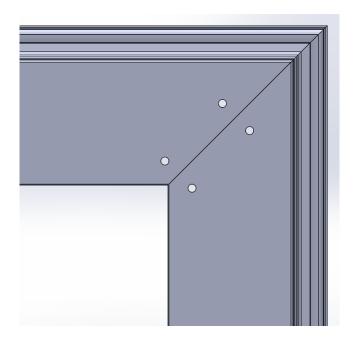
Placement of the mounting holes on the inside of the inner frame.
